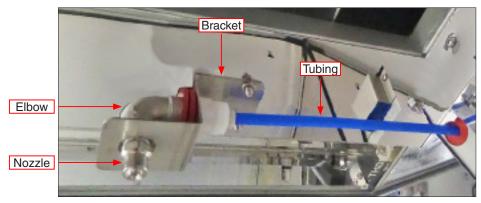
Nozzle and Bracket Assembly Mounted on Chamber Ceiling
